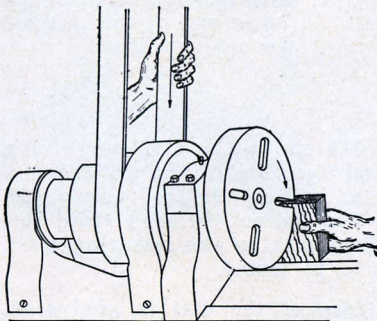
Removing Tight Fitting Face Plate from Lathe Spindle
